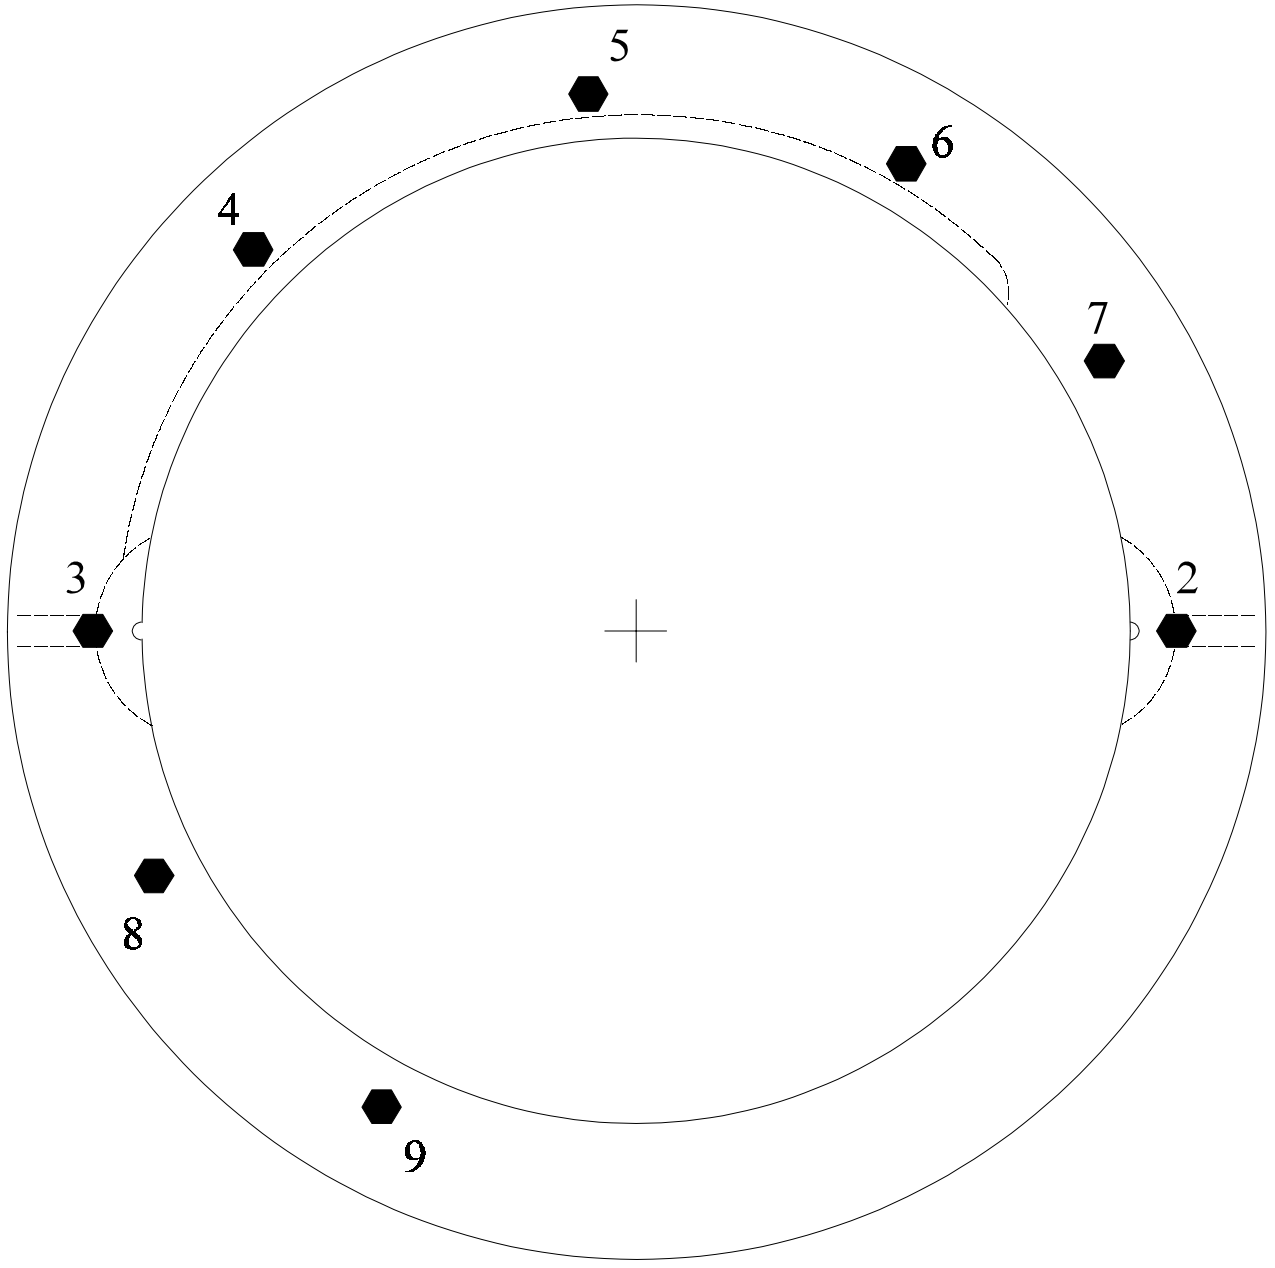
Pressure Dam Bearing Thermocouple Locations
